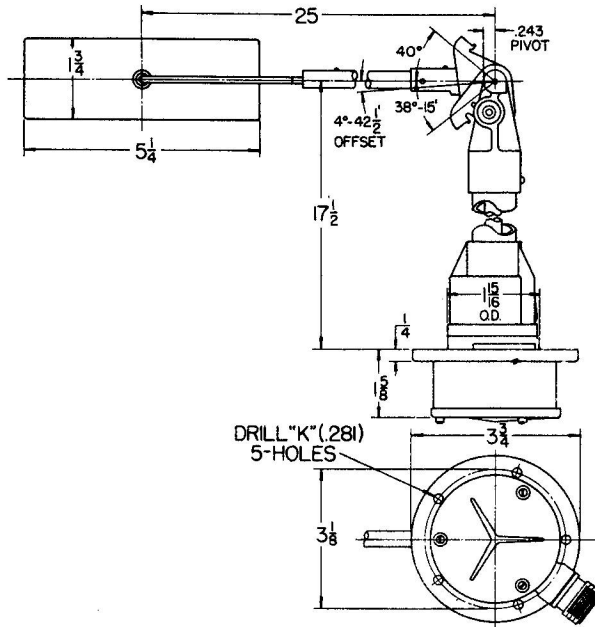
(Sheet 1 of 9 Sheets). General Dimensions
